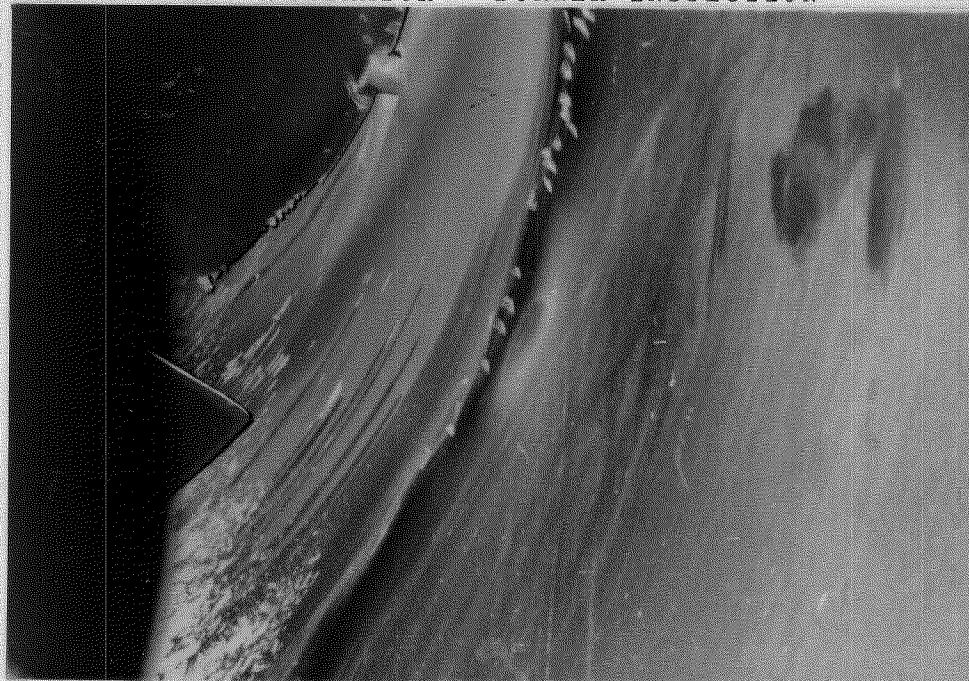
Inner air sleeve showing overheating and expansion with rippling along seam weld (Burner 1E05).
